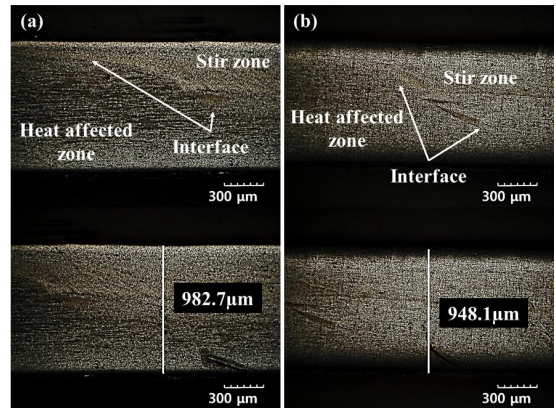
Micro structure of welding zone observed by optical microscope (a) 3500rpm, 400mm/min and (b) 6500rpm, 400mm/min
